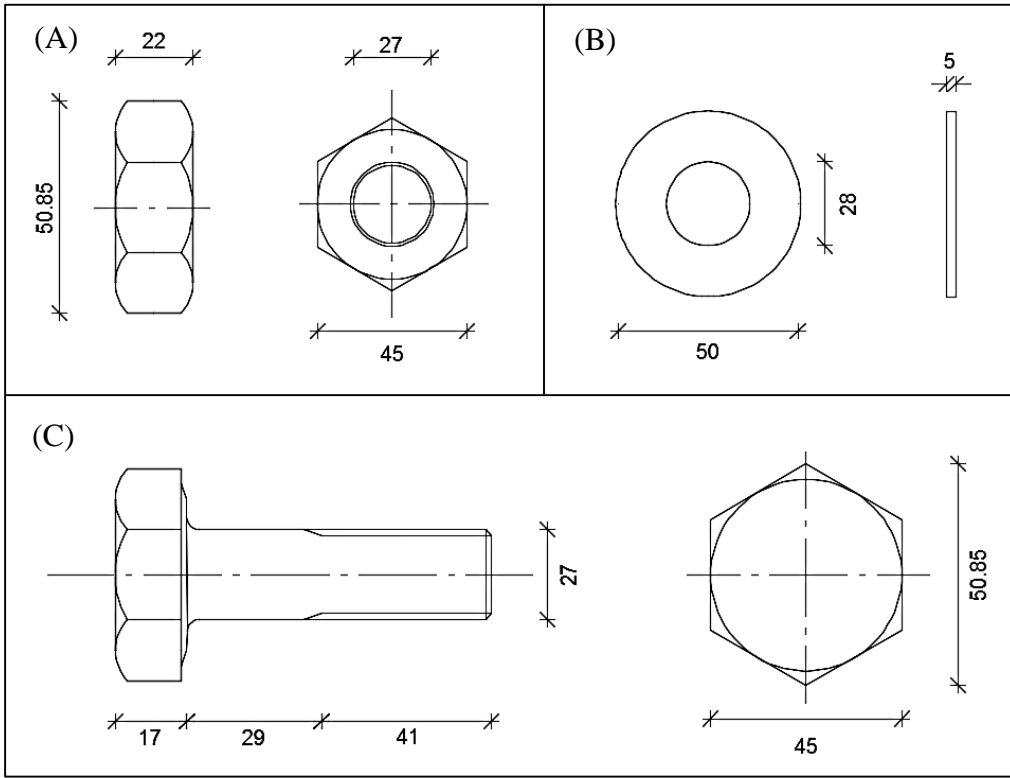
Dimensions of the bolt set. (A) shows the dimensions of the nut, (B) shows dimensions of the washer and (C) shows the dimensions of the bolt.
